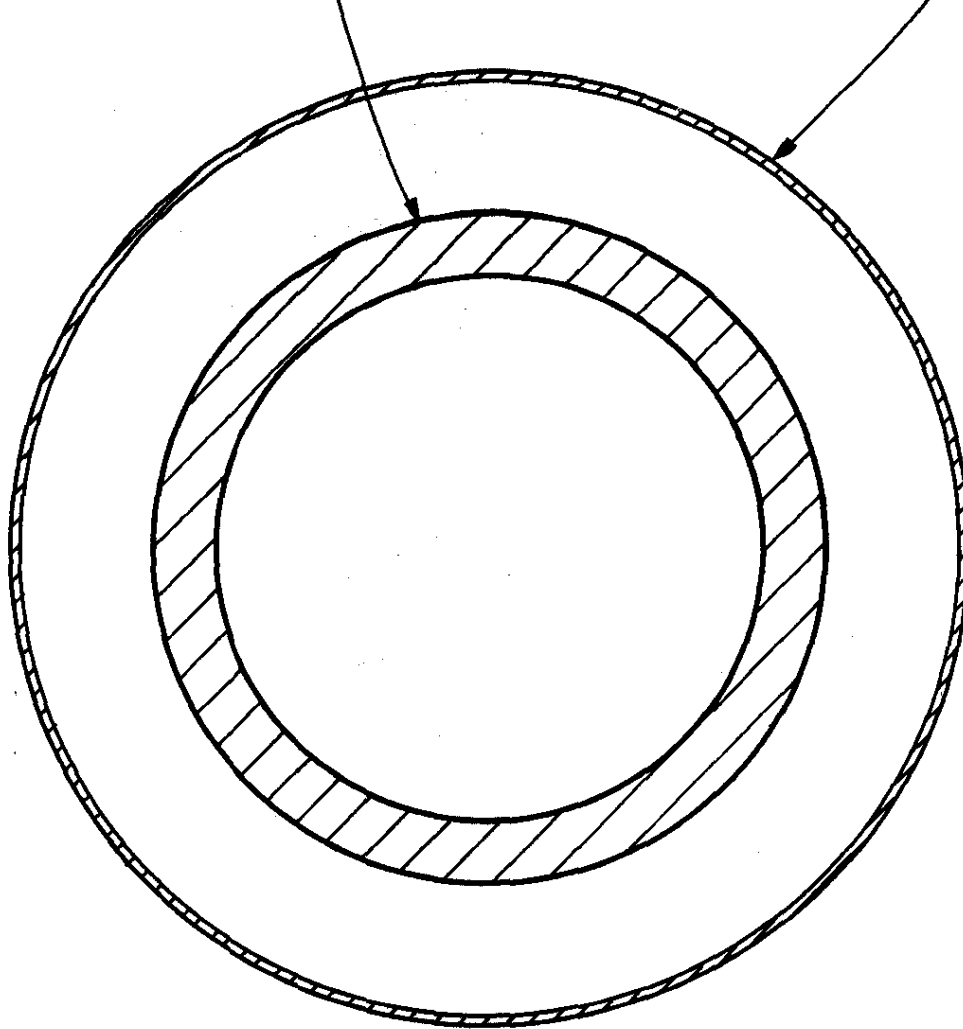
CROSS SECTION OF STEEL PIPE ABSORBER ASSEMBLY
